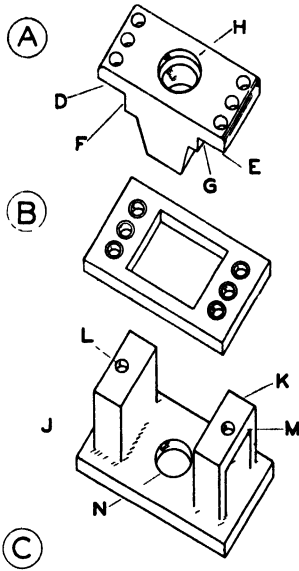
DRILLING JIG PLATE AND COMBINED JIG AND FIXTURE
